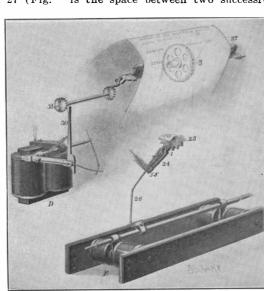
PRINTING MECHANISM AND OSCILLATING MOVEMENT,
